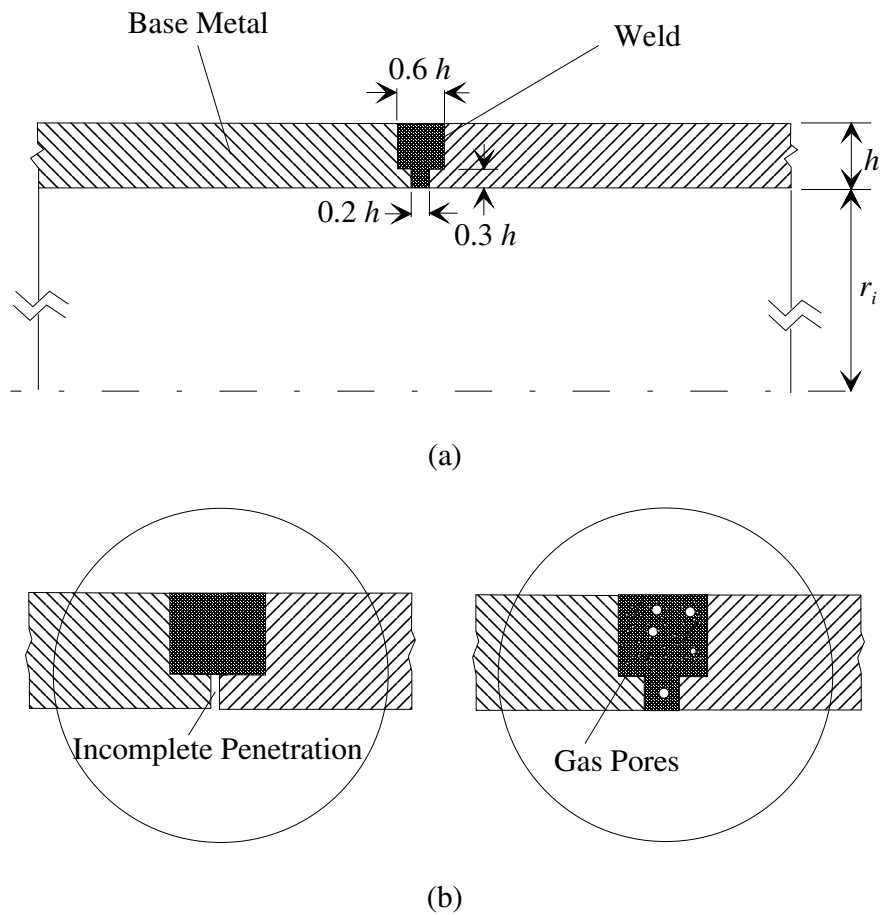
Schematics of a steel pipe with (a) ideal weld and (b) weld defects
